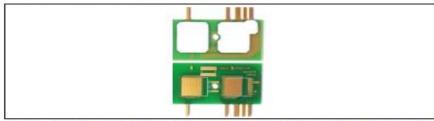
Daughter PCB with heat sink paste (pcb made in Italy by Serigroup Srl www.serigroup.it)
